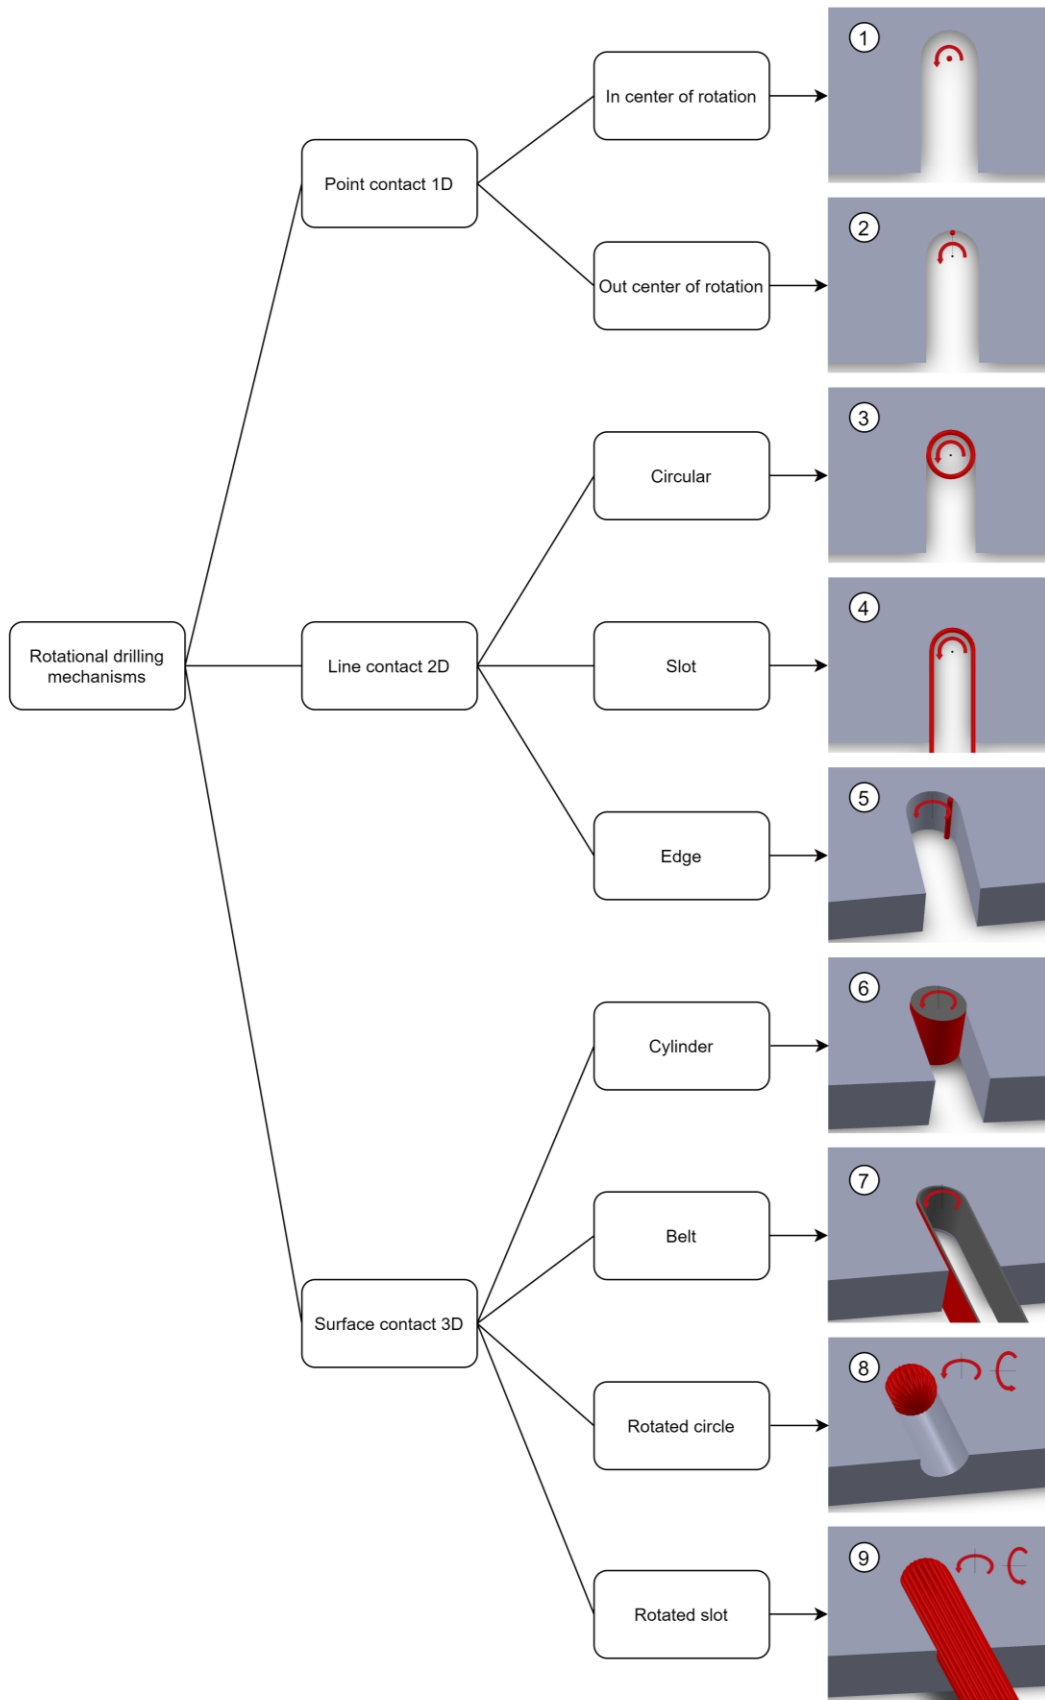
An overview of cutting surfaces that rotate along an axis perpendicular to the drilling direction. The cutting surfaces are indicated by their red colour and corresponding number and the workpiece is represented by a grey block.
